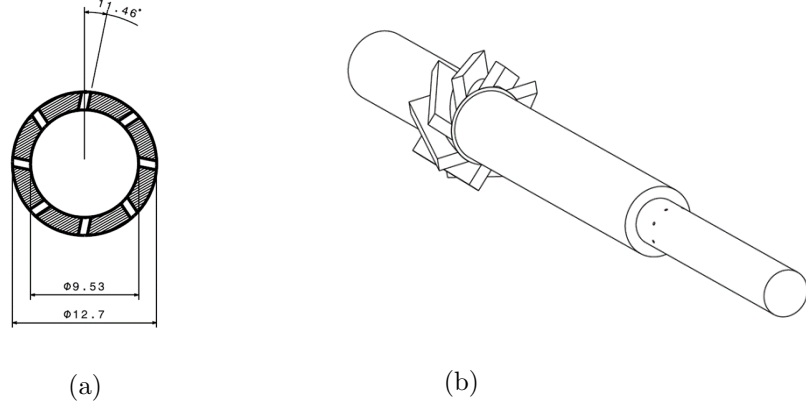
Louisiana burner: (a) fuel injection holes (dimension in [mm]) (b) Isometric view center body. The injection holes are located backward of the cross section restriction.
